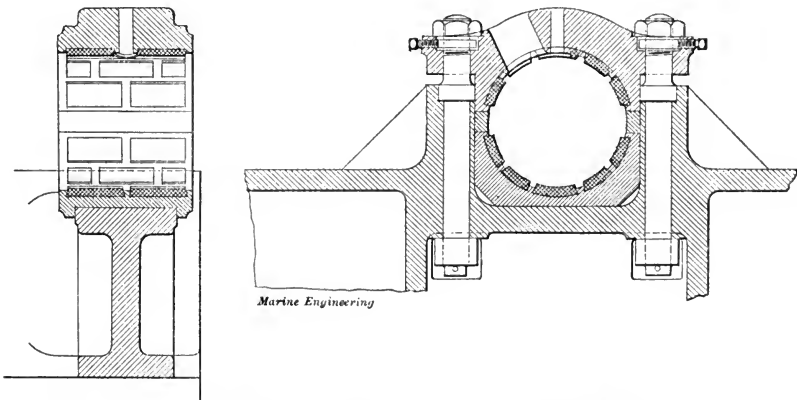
Details of Bedplate in Fig. 119. Sections Showing Main Pillow Block.
